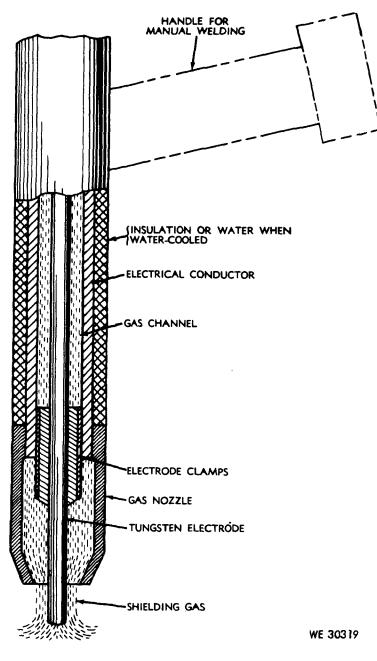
Electrode holder for inert-gas tungsten-arc welding.
